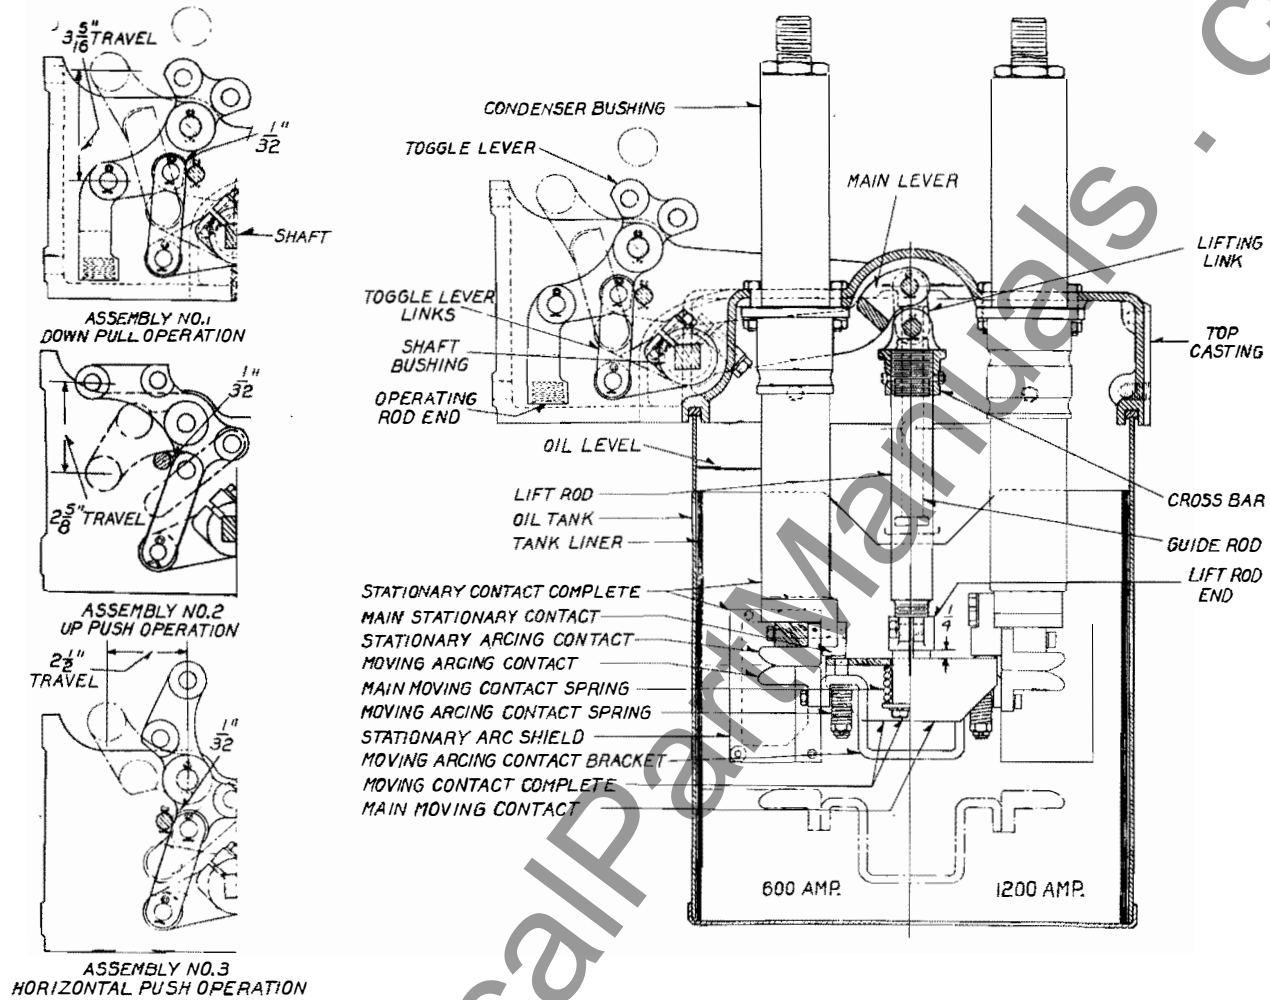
BREAKER POLE UNIT—SIDE VIEW—CROSS SECTION
